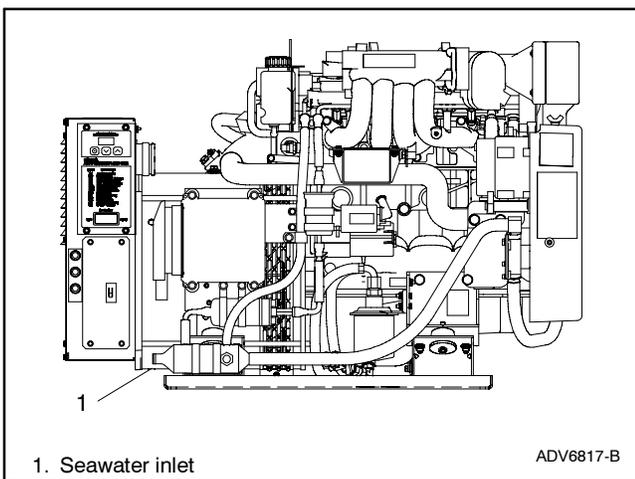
Seawater Inlet Connection, 10/13/15EG, 9/11EFG, and 13/15EGZ Models
